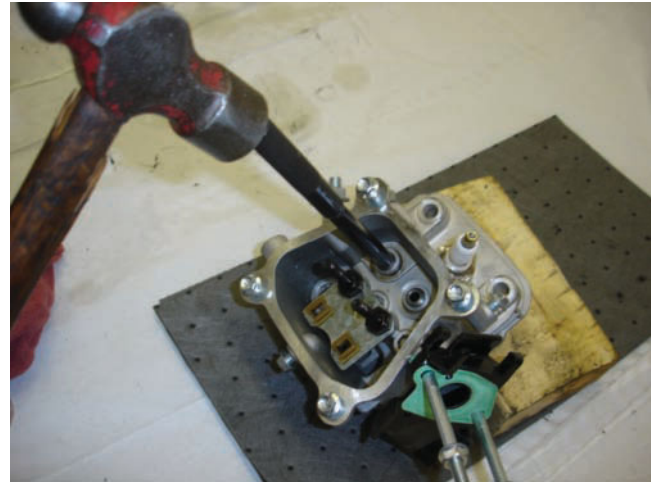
Installing a new guide from the valve spring side of the cylinder head.
